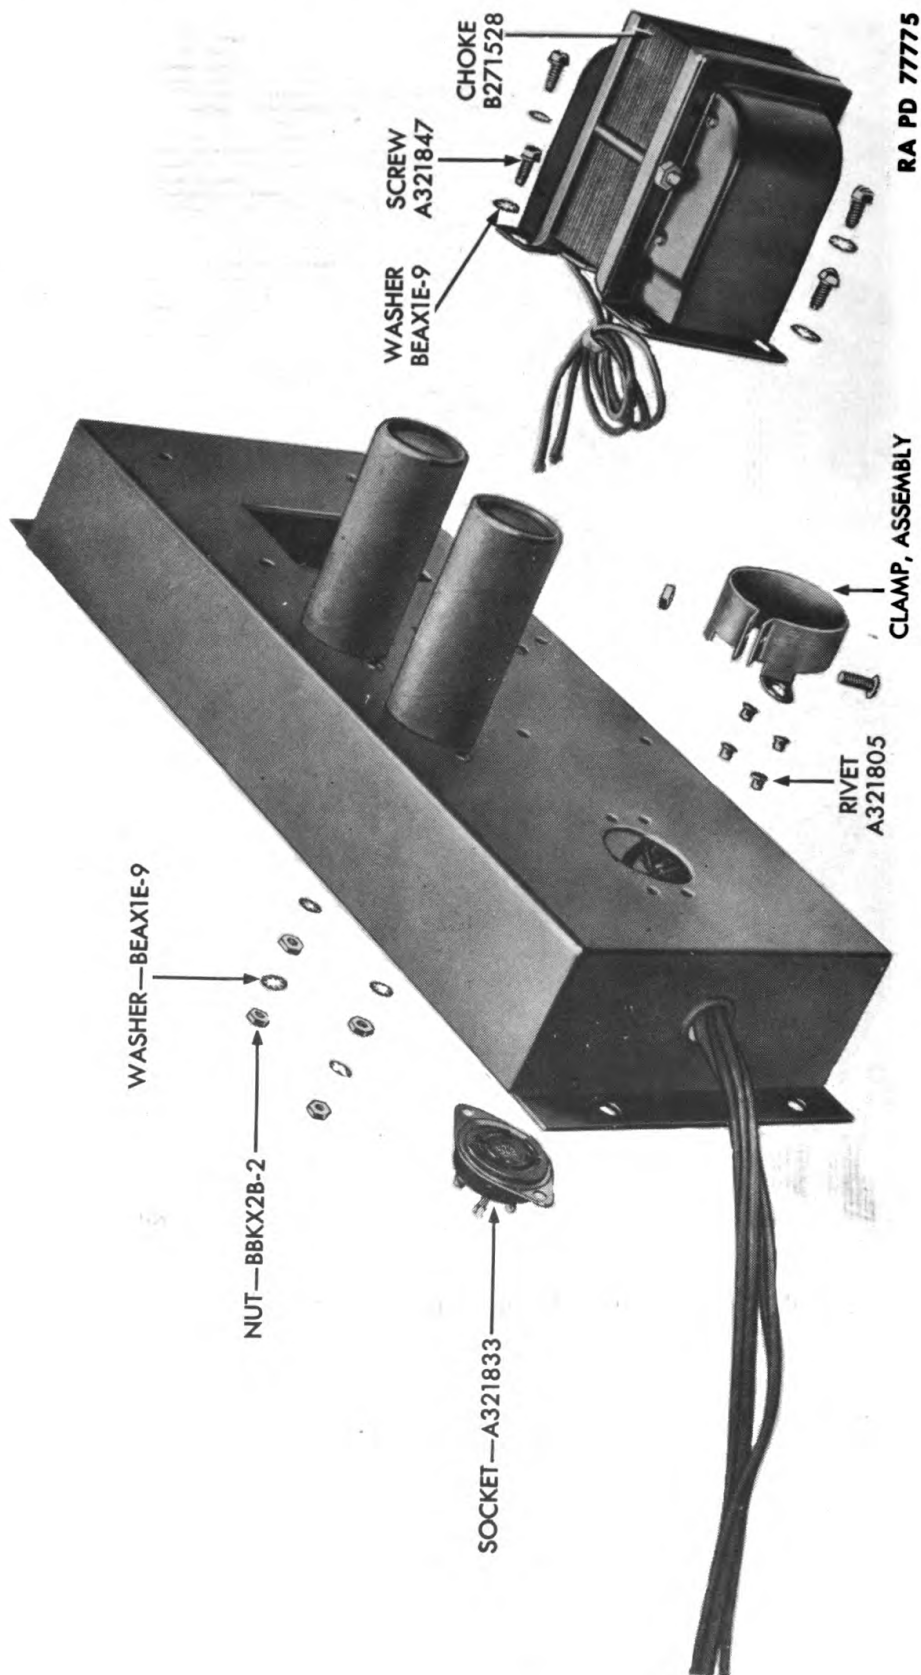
Removal of Choke, Tube Socket, and Related Parts From Power Supply Chassis
